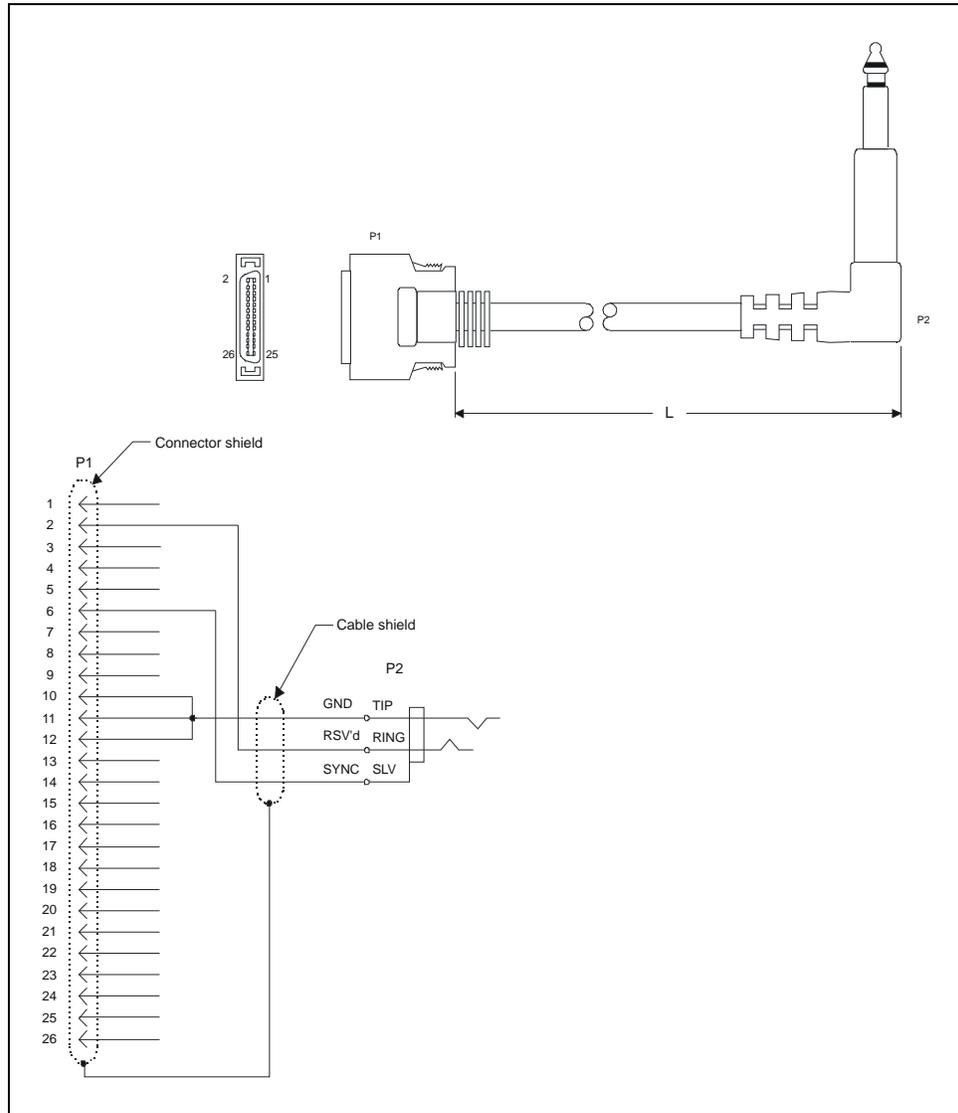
26 pin Molex to Mini Phone Plug (DPD Sync Cable)
